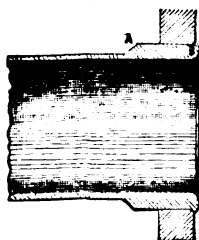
is a longitudinal section of a portion of a tube, showing Mr. Pearce's mode of fastening the flue-tube ends to the tube plates of his boilers. A short tube or ferrule, *A*, is soundly welded upon each end of the tube, so as to form strong end collars, and these enlargements are then turned down slightly in the lathe, to fit accurately to the hole in the tube plate. When properly adjusted in the tube plates, the projecting edges of the collars are riveted or caulked over with the hand hammer, as at *B*. As to the breadth
